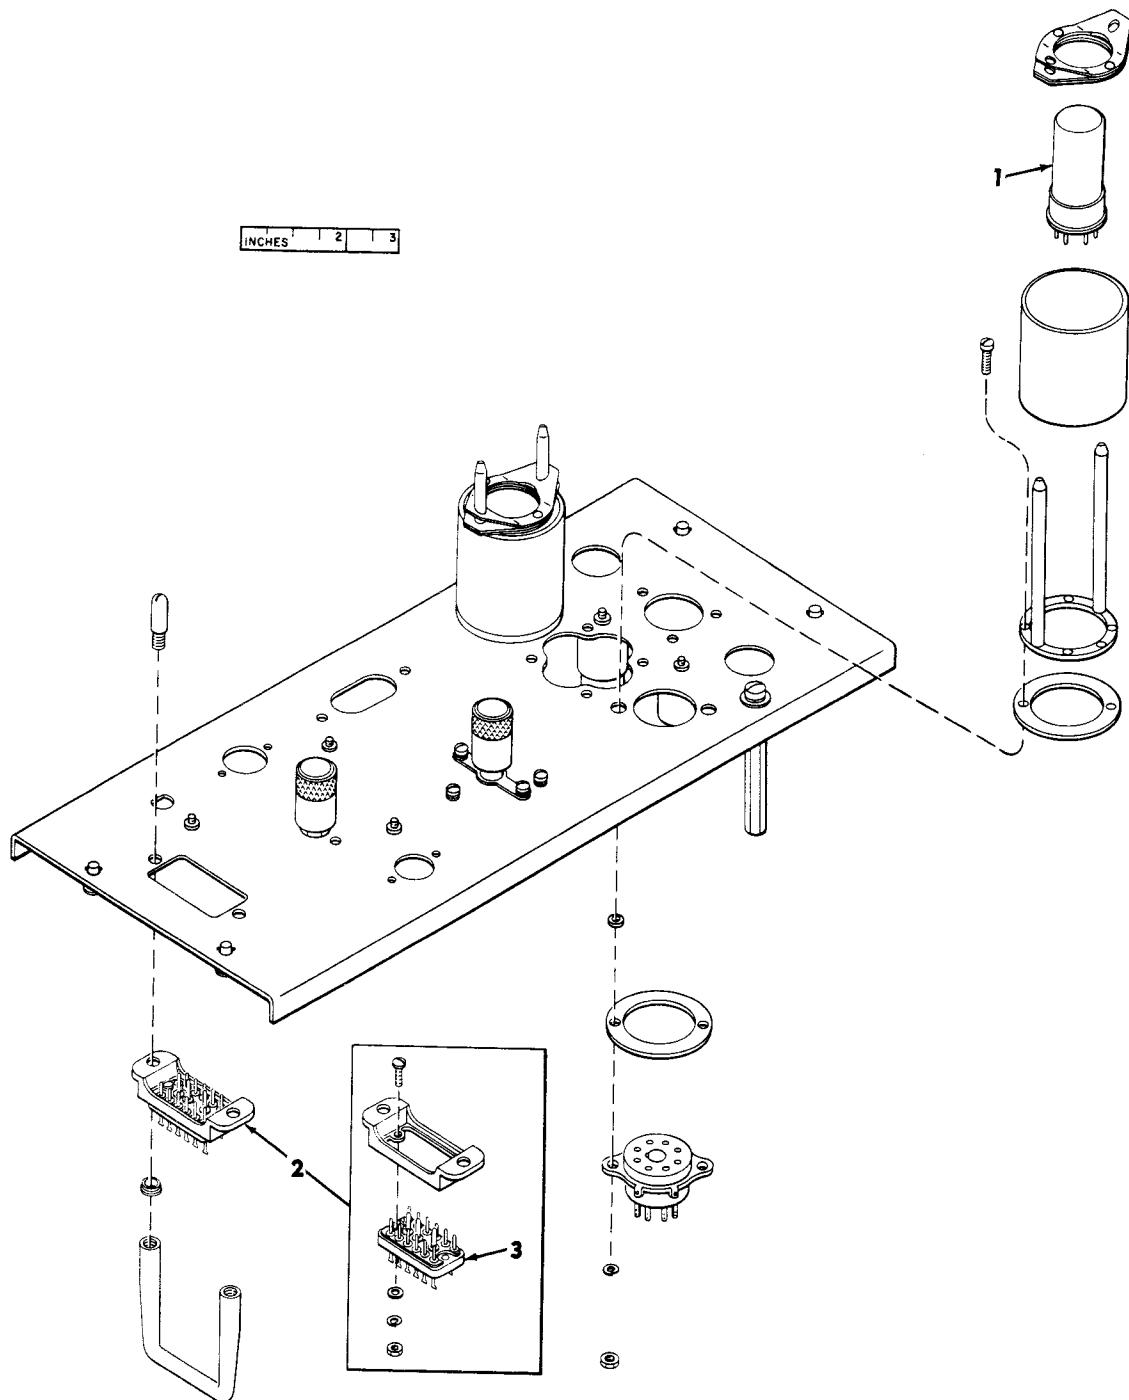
Generator, pulse O-304/M (8007726)—partial exploded view
